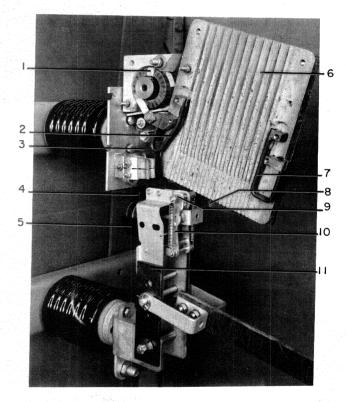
Cutaway View of SE-9 Switch in Fully Closed Position
